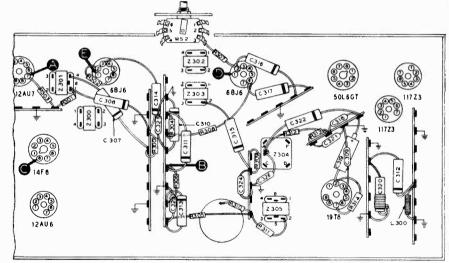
Bottom View, Showing Section 3 Test Points TP-6461
